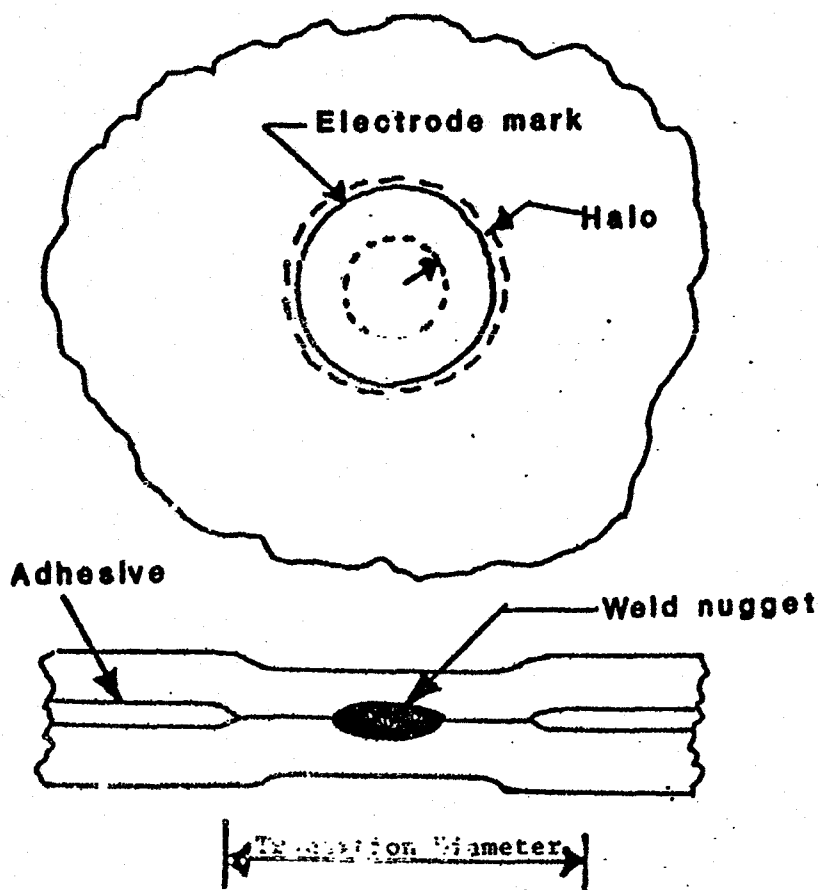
Schematic cross-section of a spotweld in a single-lap weldbonded joint.
